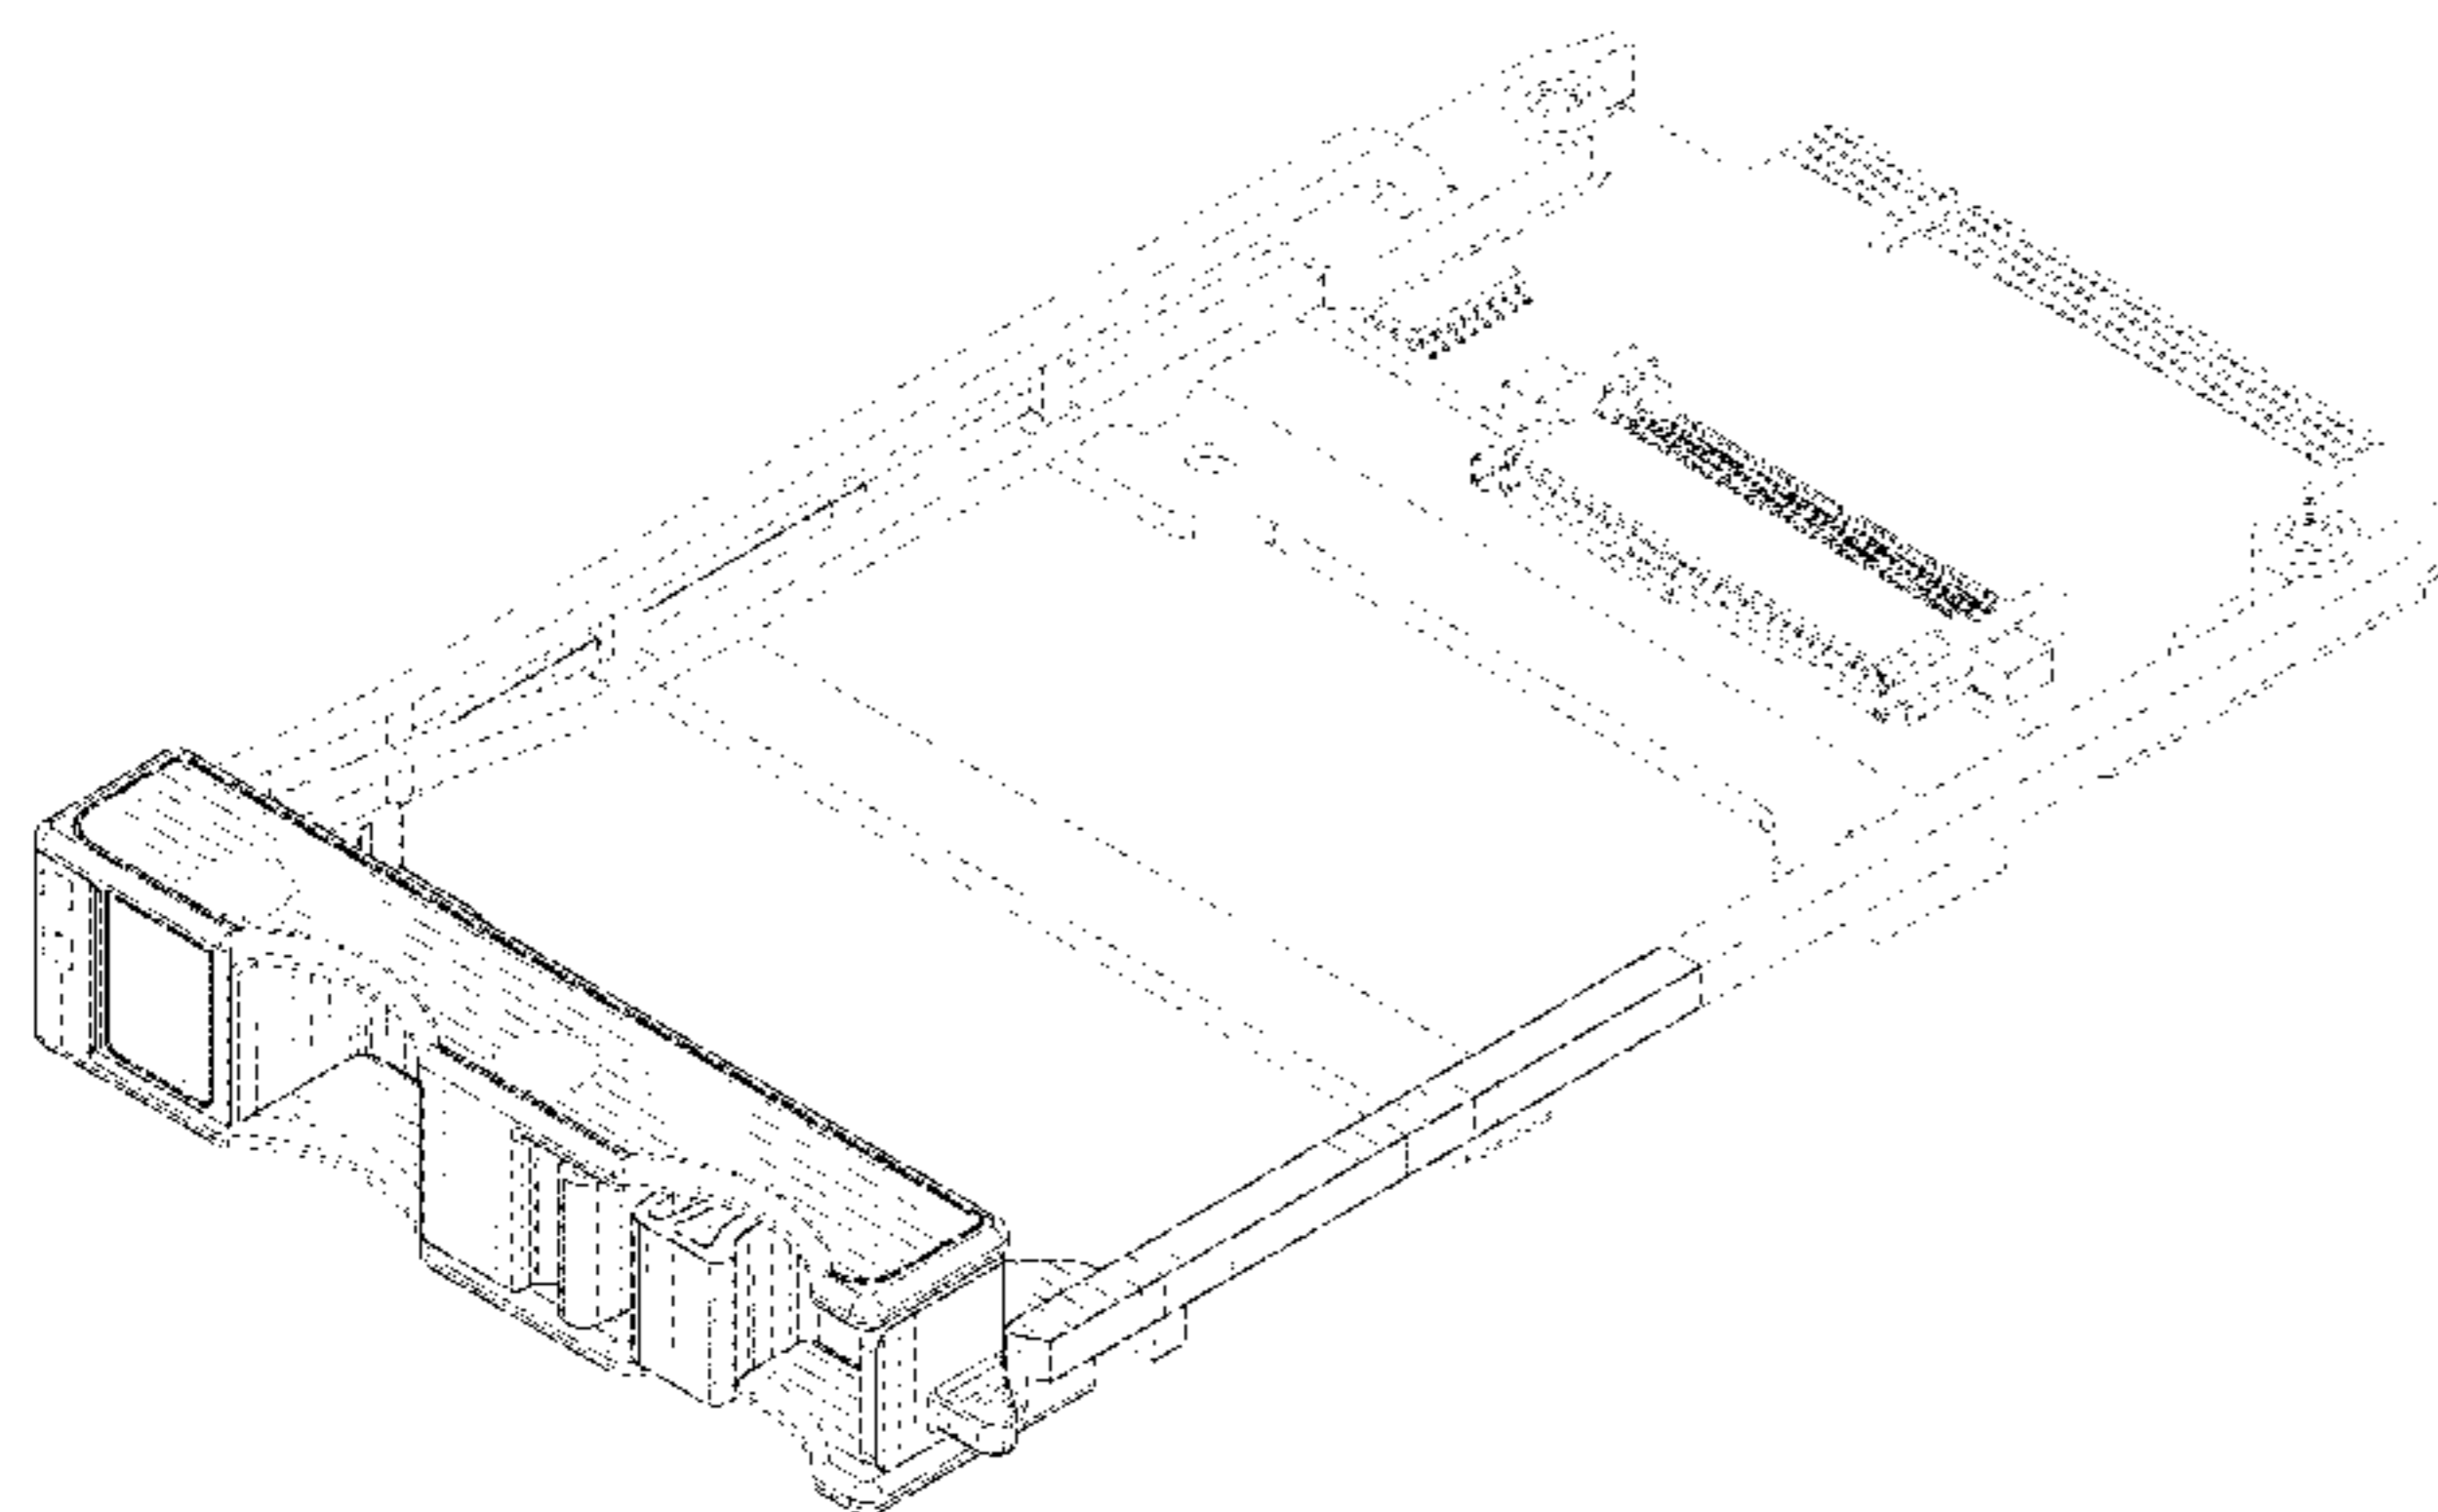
is a top back perspective view of the first embodiment of the present design.
